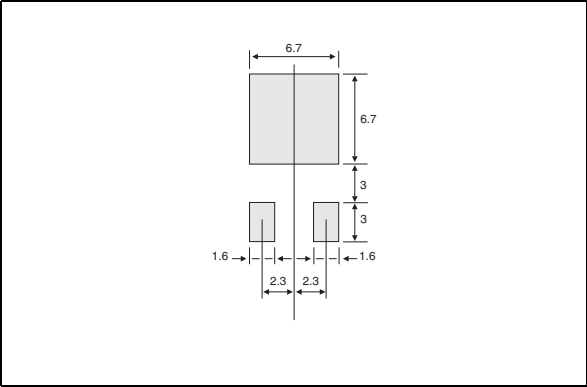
D<sup>2</sup>PAK Package Mechanical Data
